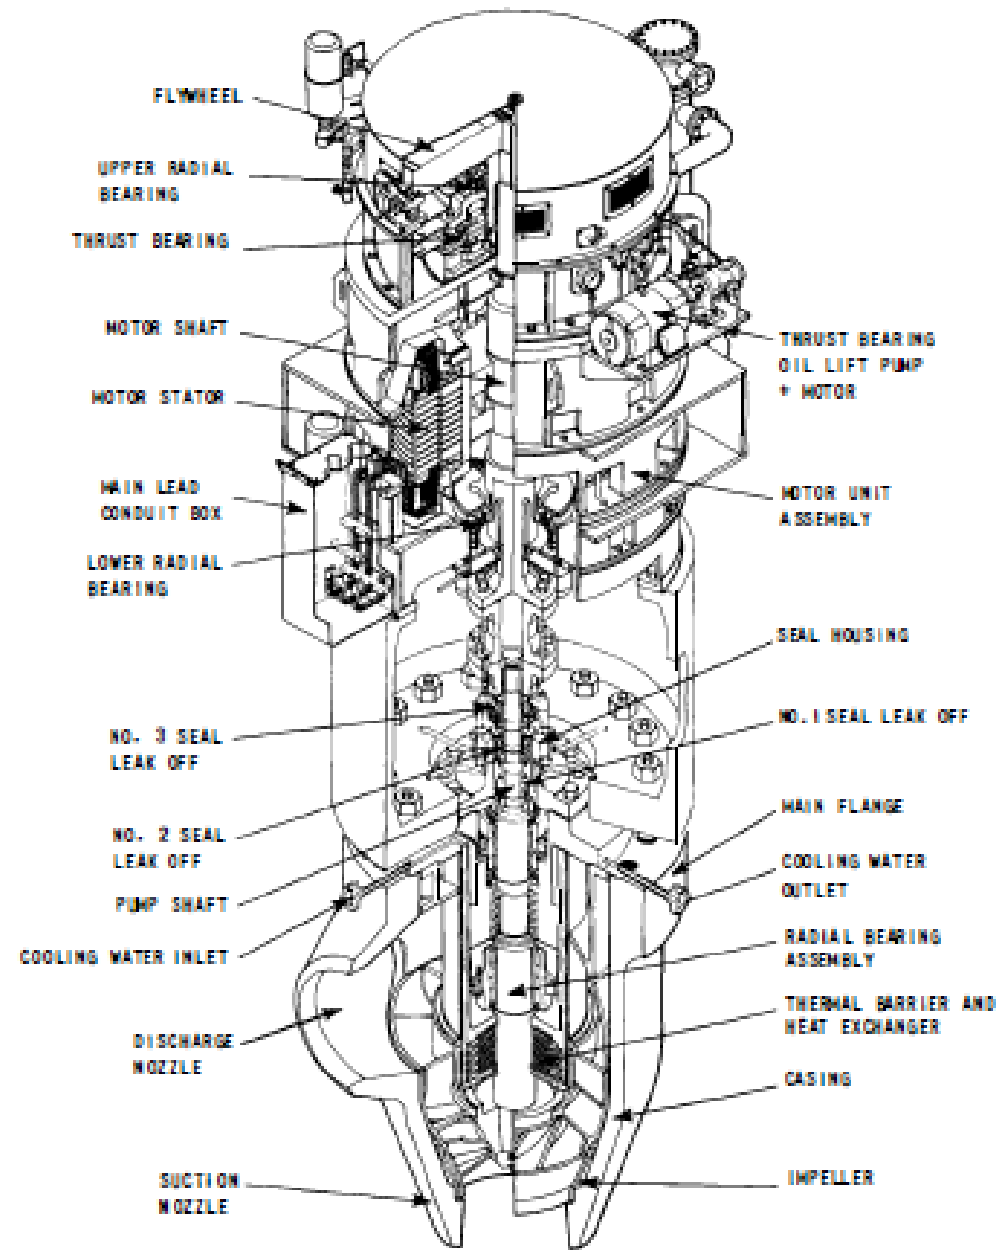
Cutaway of typical reactor coolant pump (courtesy Westinghouse Electric Corp.).
